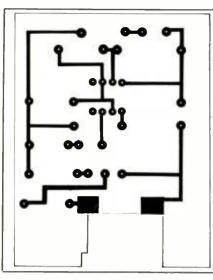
Actual-size etching-and-drilling guide for project's printed-circuit board.
